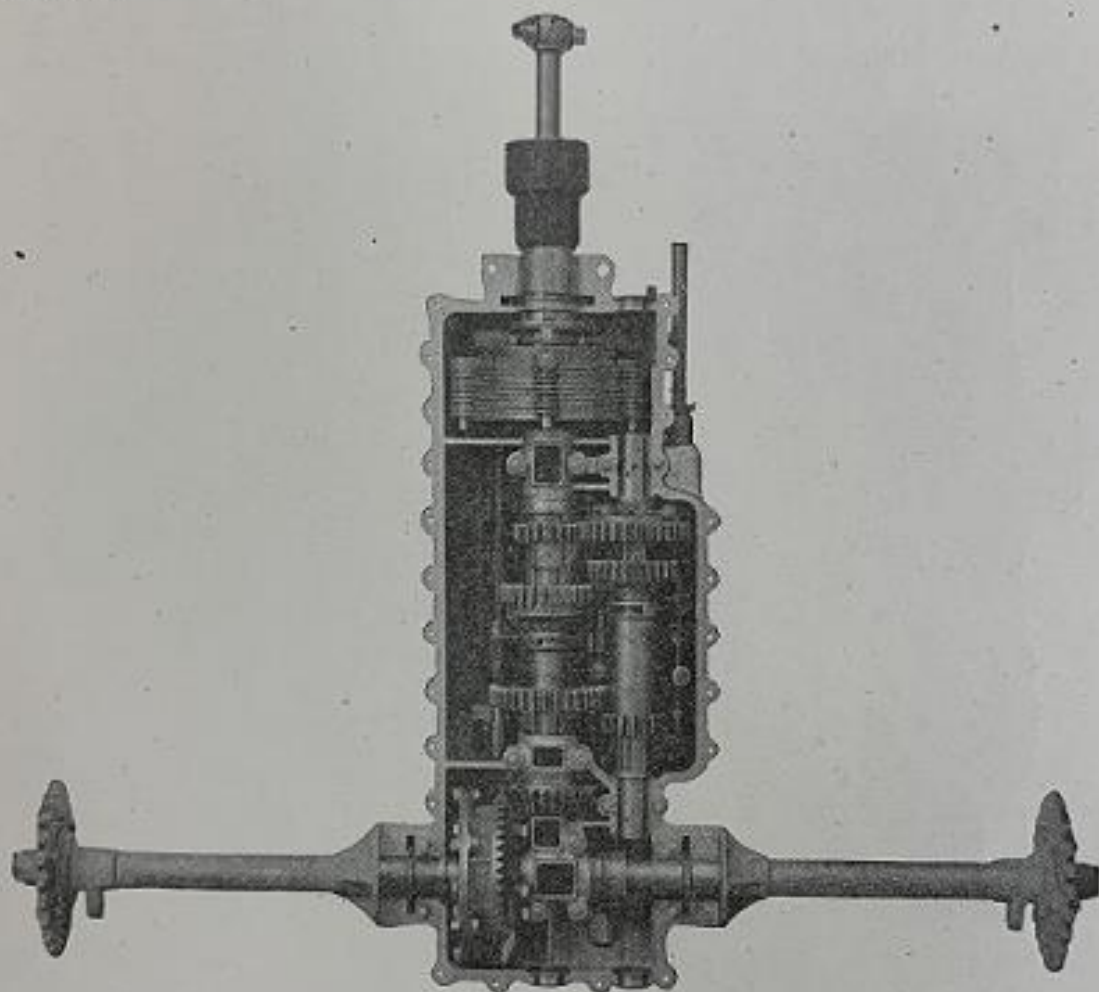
Clutch, Sliding Gear and Counter Shaft.
